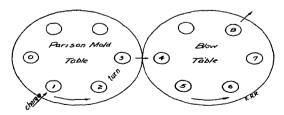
Automatic glass bottle making machine; the two revolving tables.
